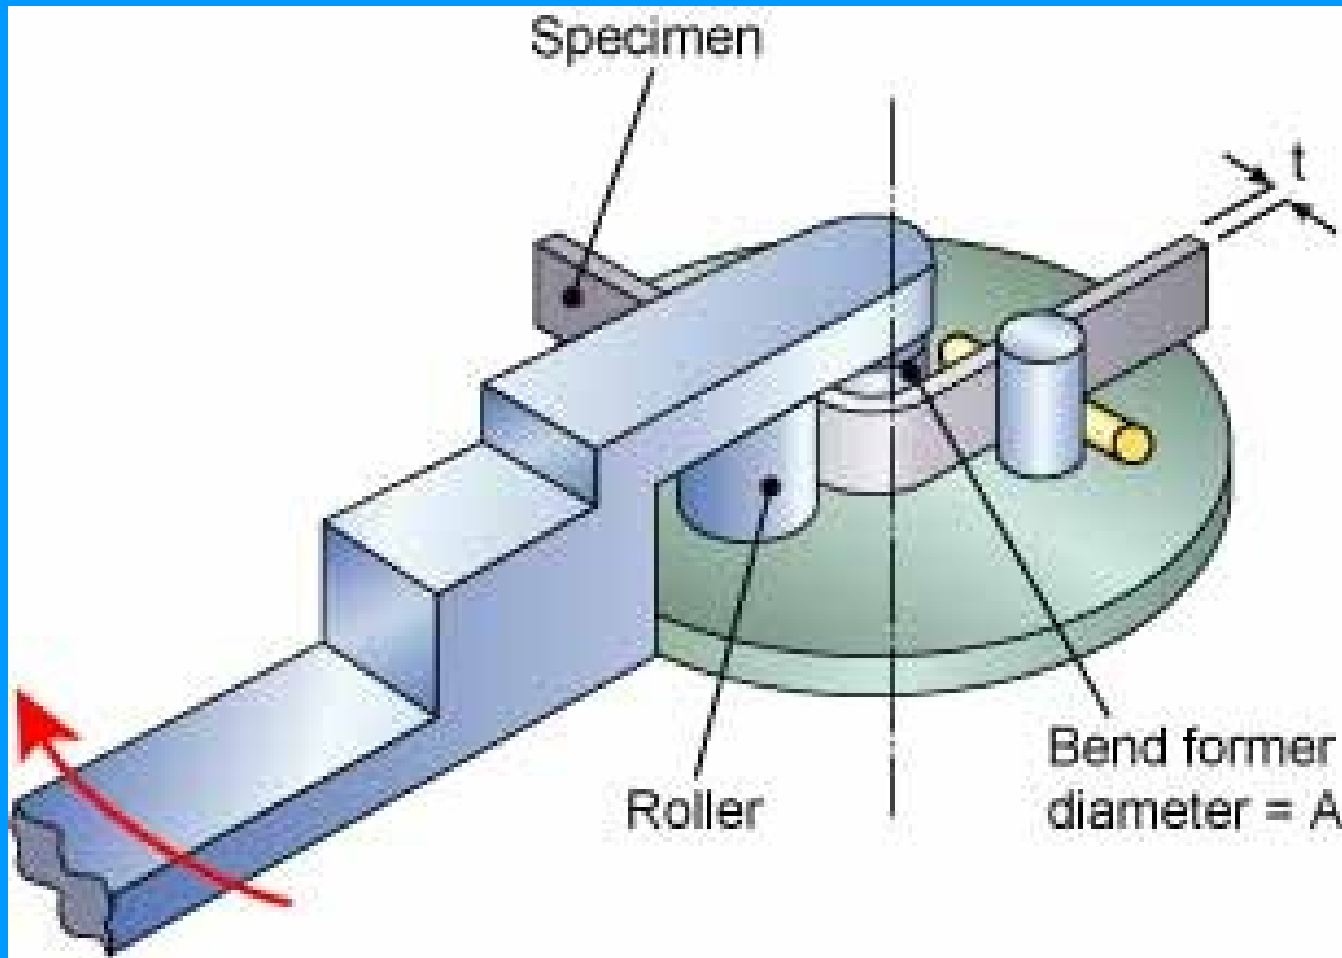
(b) shows a wrap-around guided bend test machine that works on the same principles as a plumber's pipe bender
